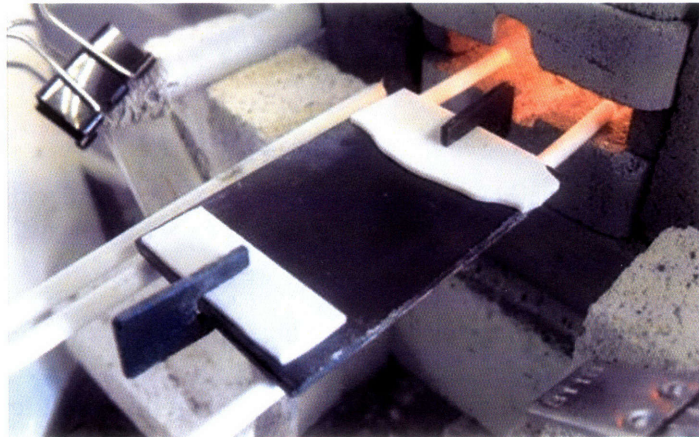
Clamped stack of two backing plates (black), clamps (fork-shaped black pieces), and compressive spacers (white) to ensure rigid fixturing. Underneath the large black backing plate is the sample (not visible in this photo), sandwiched between two compressed layers of silica powder.
